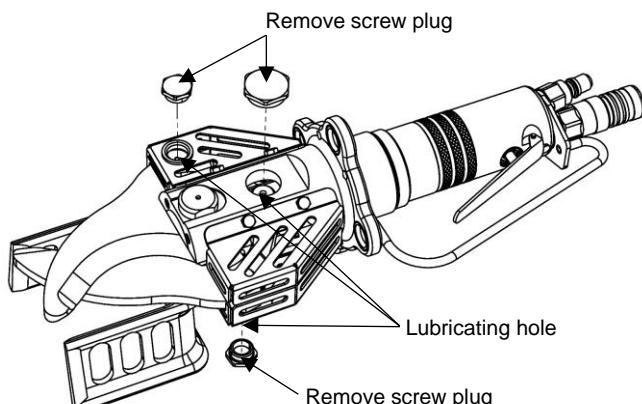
Lubricating points – machine with guard plate (example Z079)
